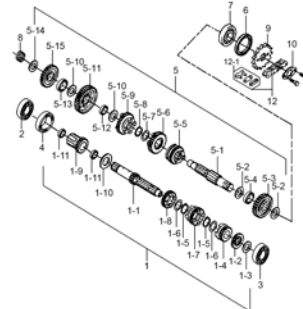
GEAR SHIFTING (P05-S160-0018)
